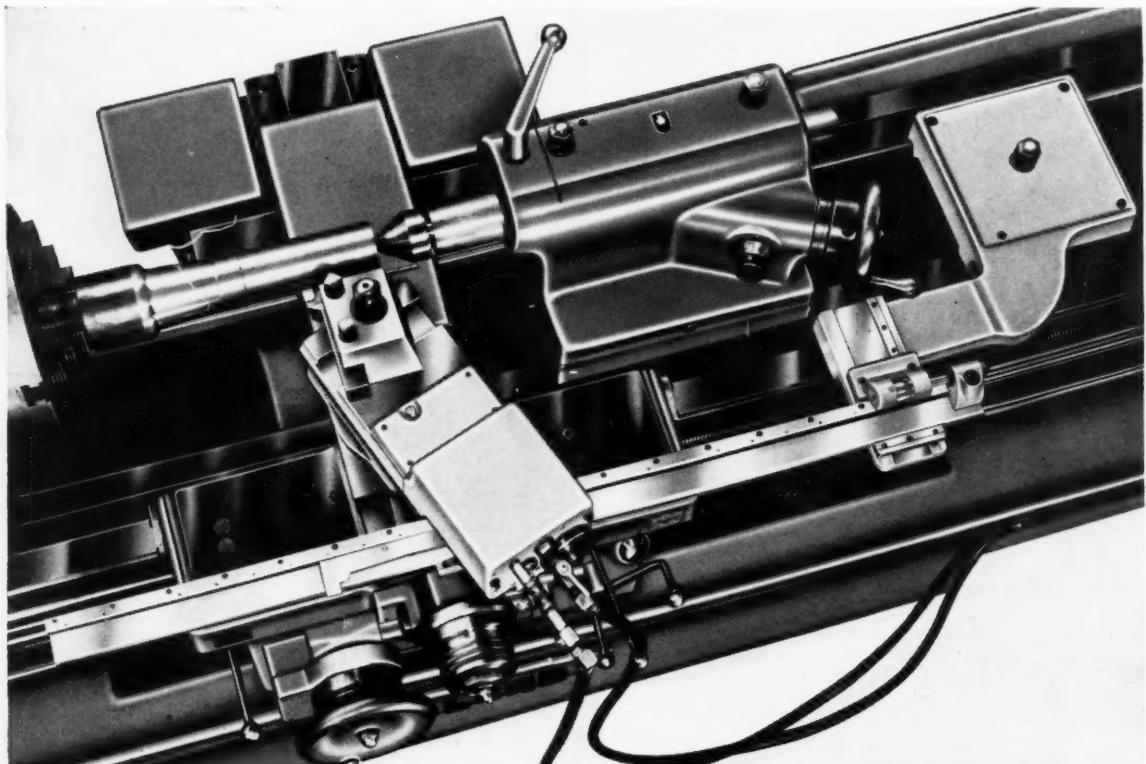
LeBlond 16-inch lathe equipped with new "Hydra-Trace" attachment for shaft duplicating
